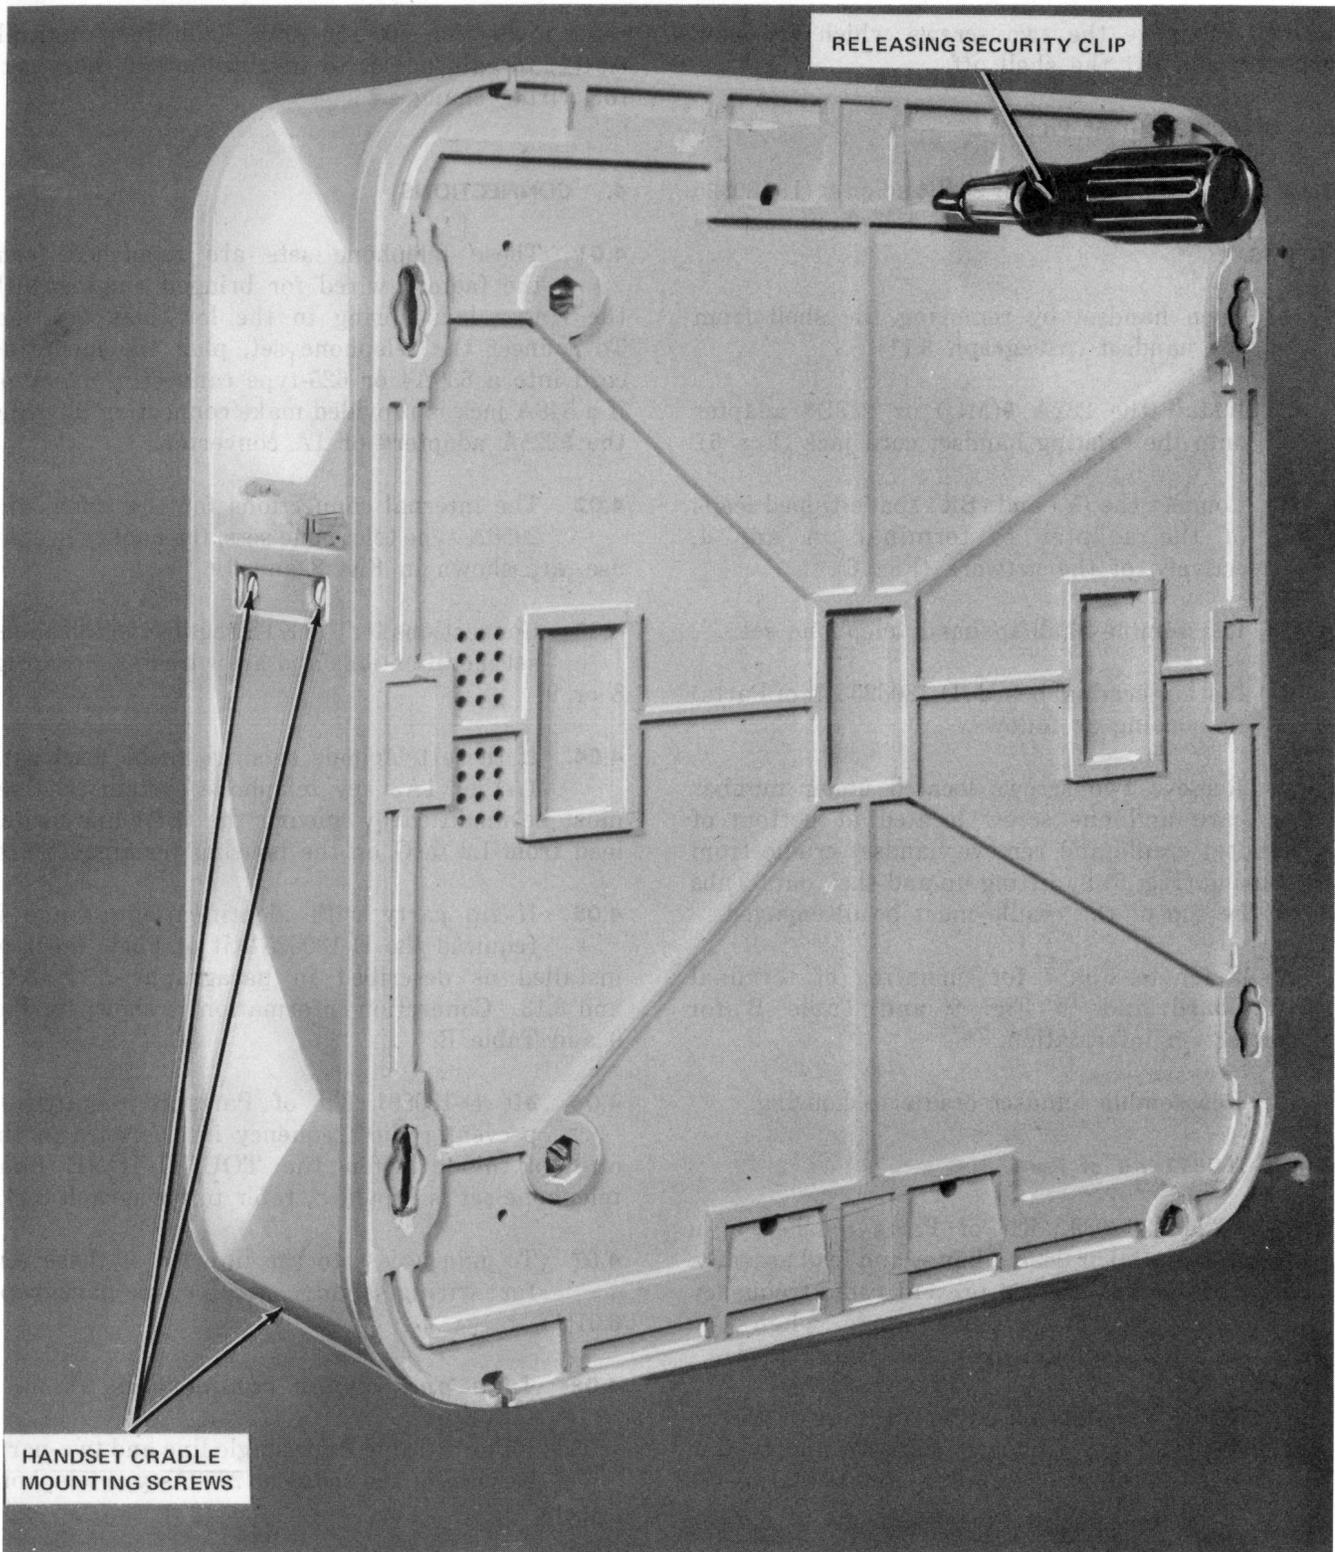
950A- or 2950A-Type Telephone Set With Panel and Frame Removed
